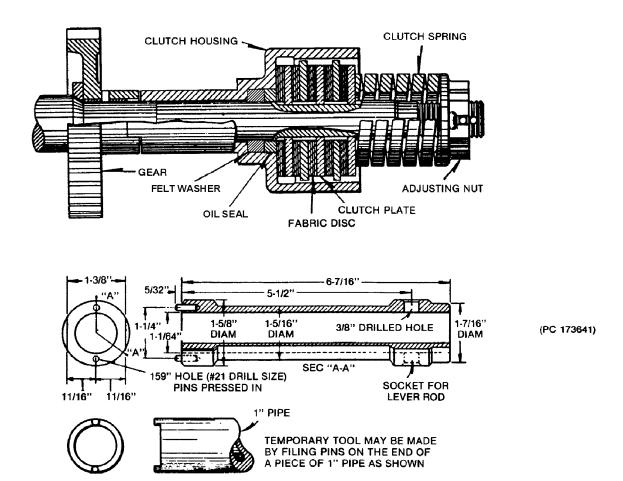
Friction Clutch Assembly and Special Tool for Installing Gland Nut
